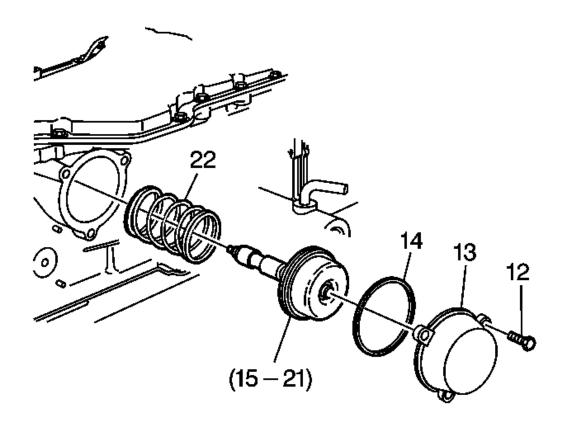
View Of Servo Assembly Courtesy of GENERAL MOTORS COMPANY
